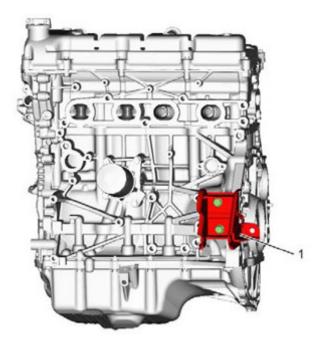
Identifying Engine Front Mounting Bracket Courtesy of SUZUKI OF AMERICA CORP.
